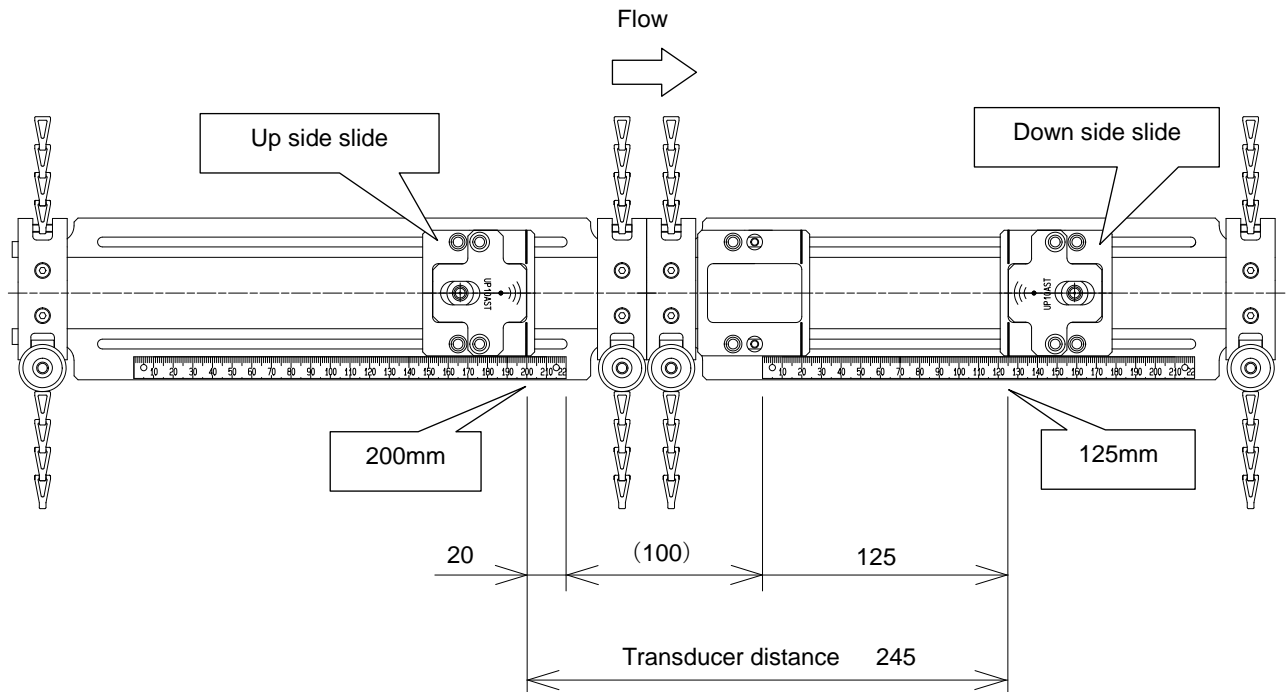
Sample of combine mounting fixture (Transducer distance : 245mm)
